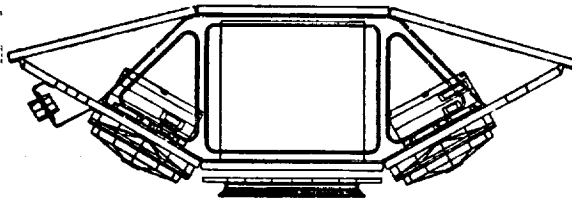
CSI-Star CAD Layout Drawing - Bottom View
